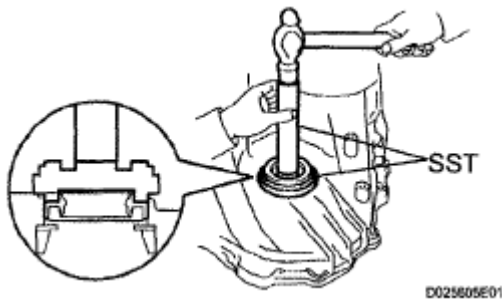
Installing Differential Side Bearing Retainer Oil Seal
